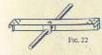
shows how to faster an anglenumber to a shaft rod. The screw of a collar is removed and the rod is inserted through the collar and one of a pair of holes of an angle-member. Then the screw is inserted through the other hole in the angle-member and tightened to hold the member in the desired position. A connector may be similarly secured. An example of this use is the mann can built with the
